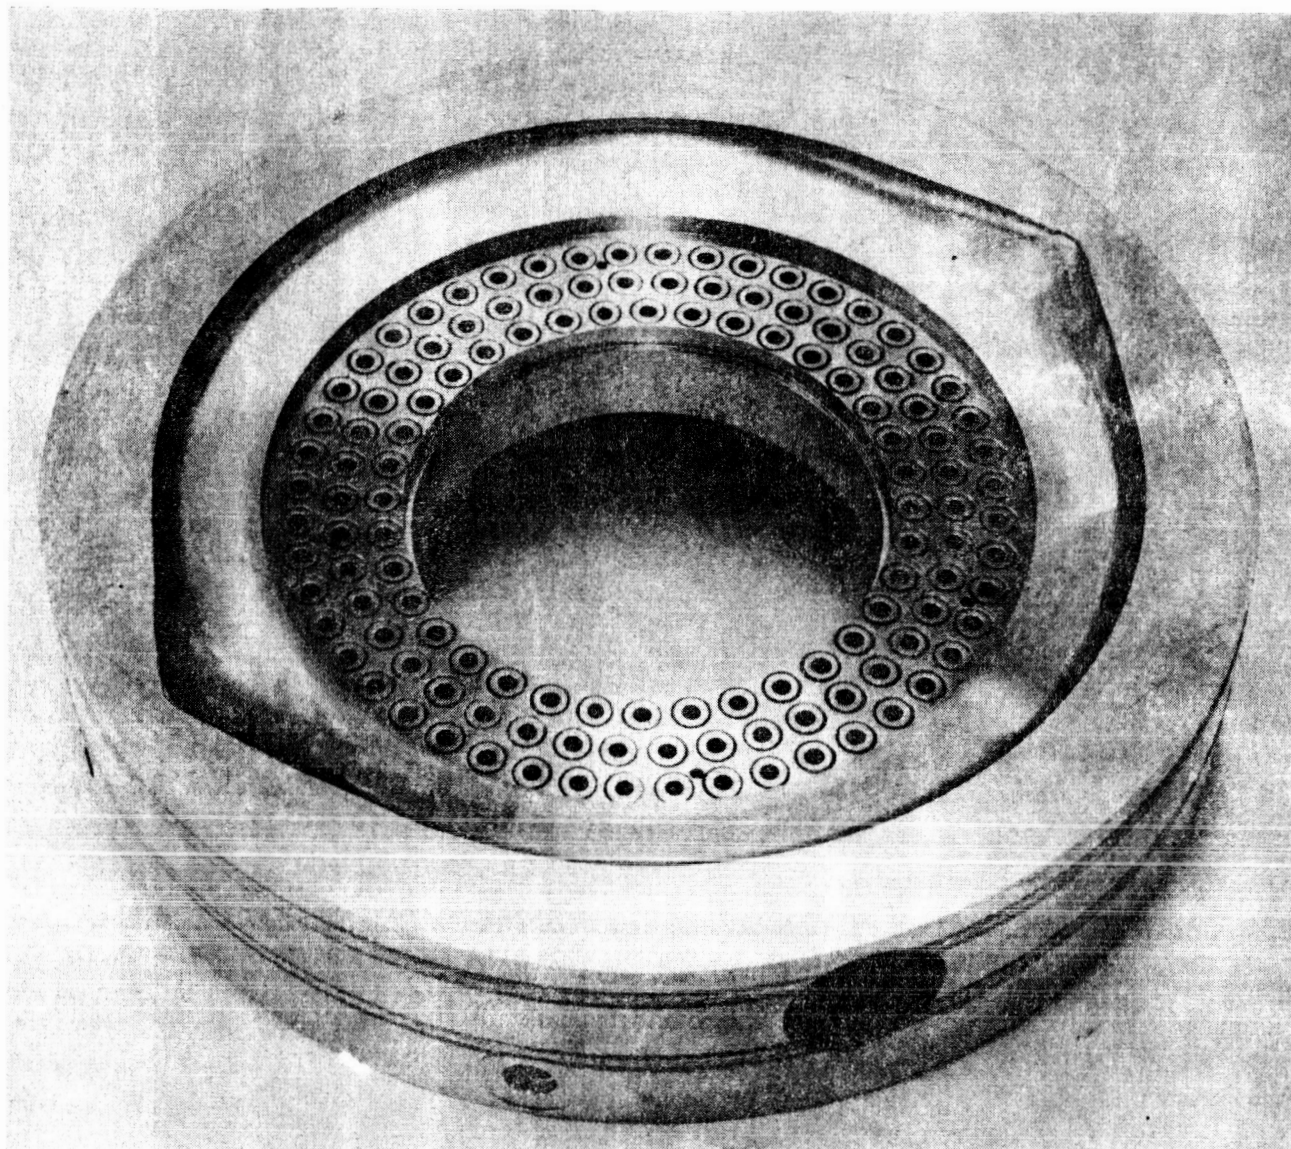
Secondary Injector - Oxidizer Cavity Side After First Braze
